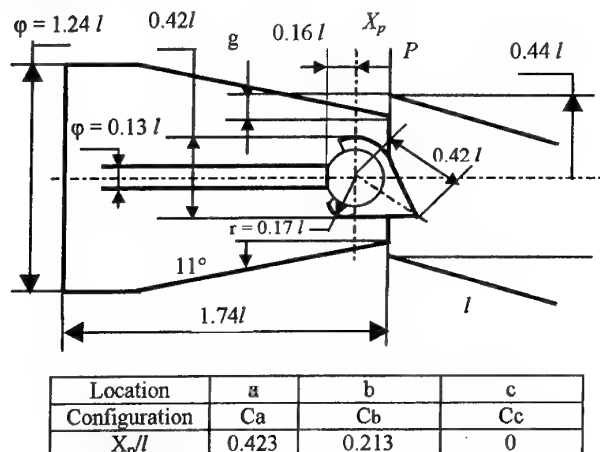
Schematic drawing of Nozzle/plug/vanes configurations
